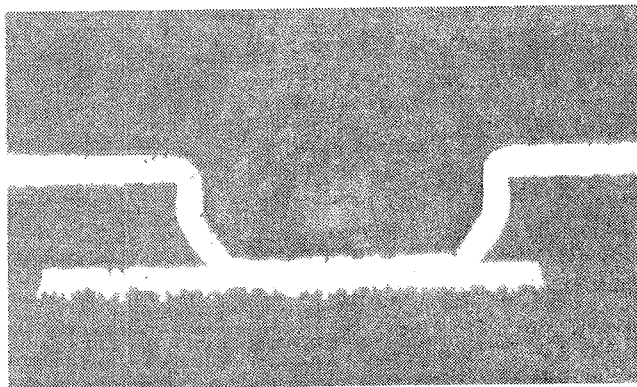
Cross section through a plasma etched blind via after hole forming and Cu plating.
